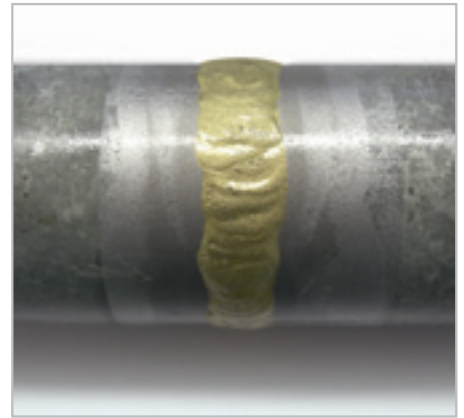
| Galvanized steel pipes braze welded with BrazeTec 60/40
